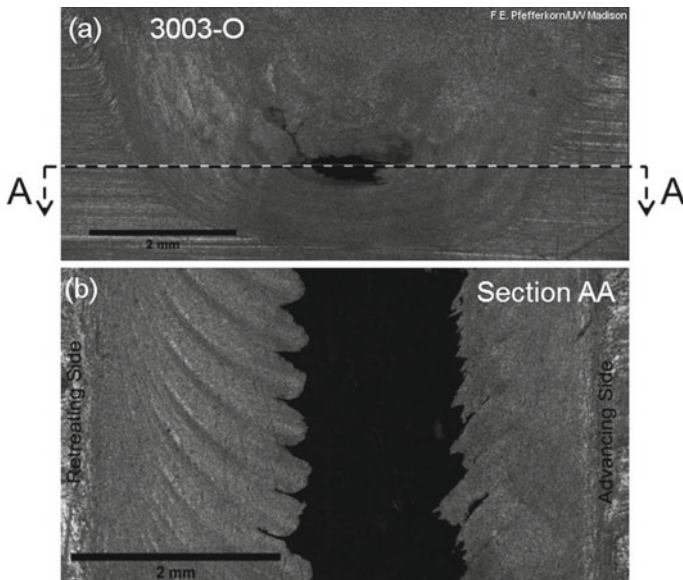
Reflected light images of a transverse cross section of b section view in the plane of welding showing the incomplete extrusion of material once per tool revolution resulting in the formation of a void
